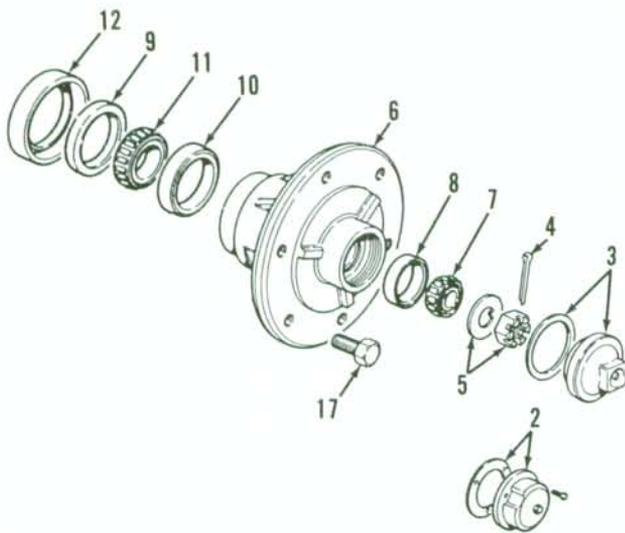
Exploded view of wheel hub typical of two-wheel-drive models.
